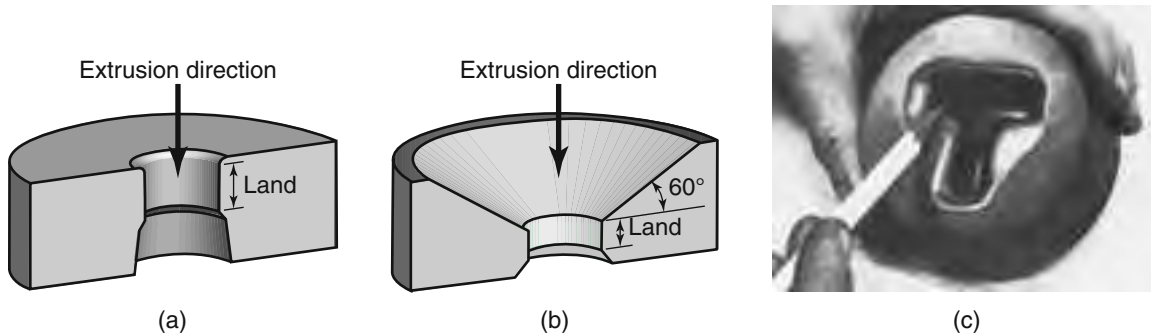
Typical extrusion–die configurations: (a) die for nonferrous metals; (b) die for ferrous metals; (c) die for a T-shaped extrusion made of hot-work die steel and used with molten glass as a lubricant. *Source:* (c) Courtesy of LTV Steel Company.
